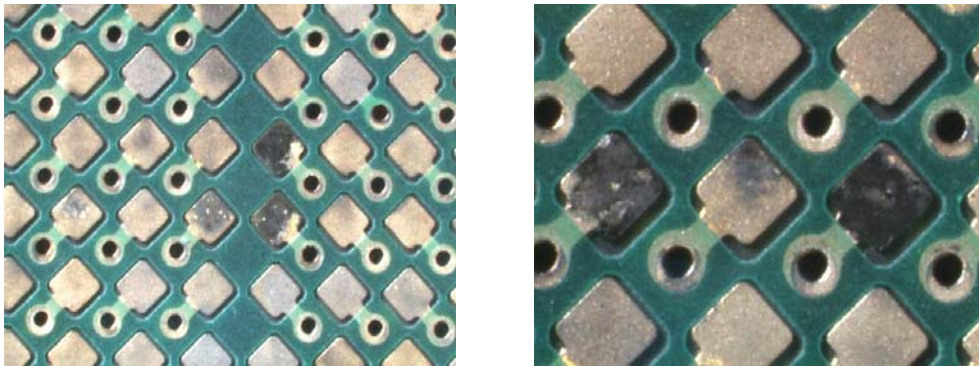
shows after cyanide stripping “black pad” which would result in poor solder joint formation.
